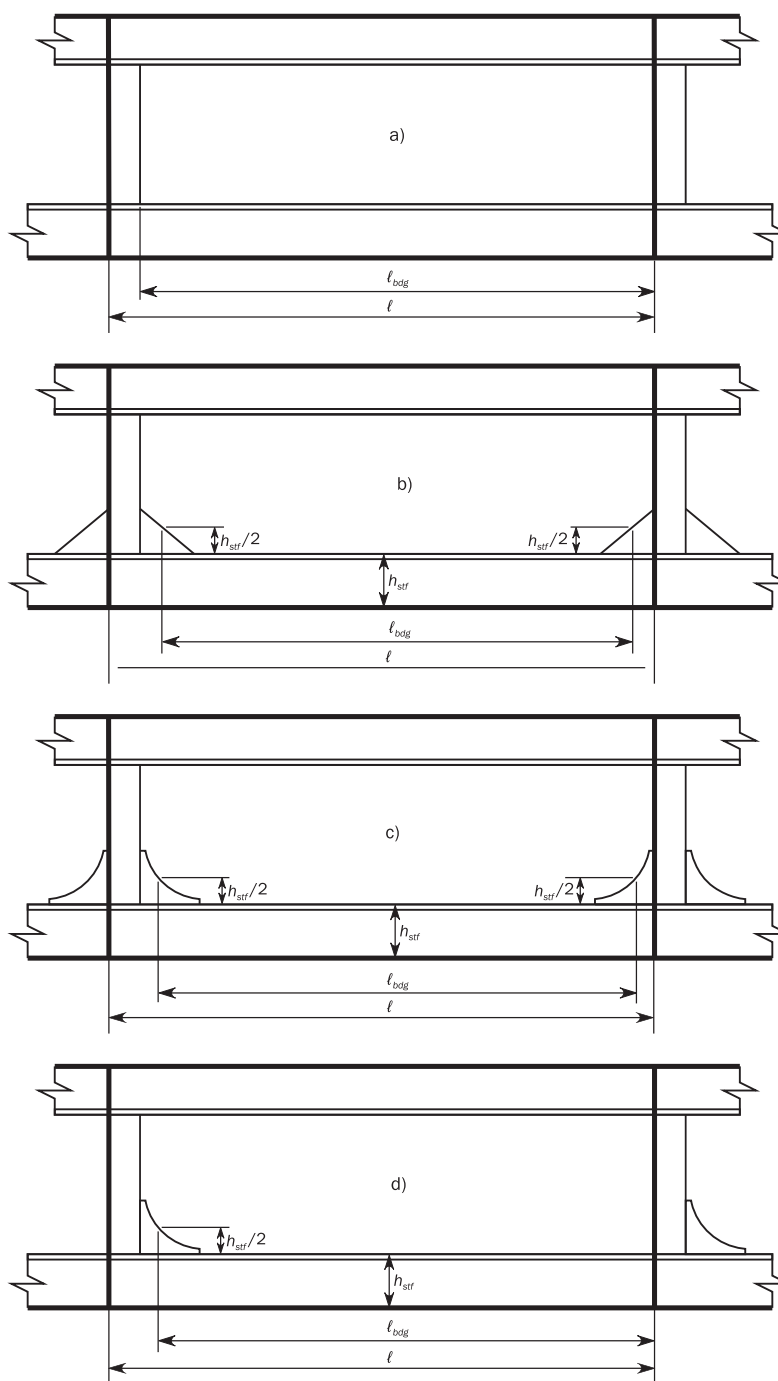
Effective bending span of stiffeners supported by web stiffeners (double skin construction)
